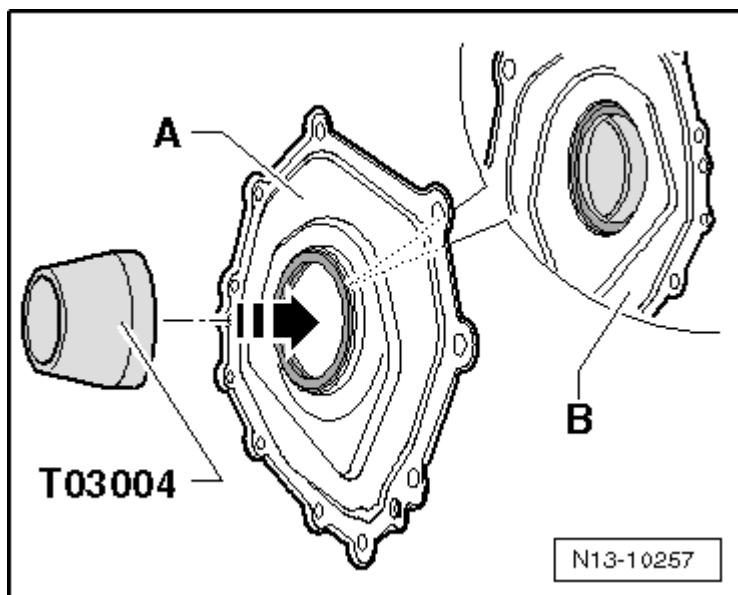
Removing Assembly Sleeve T03004 And Sliding It Into Sealing Ring
